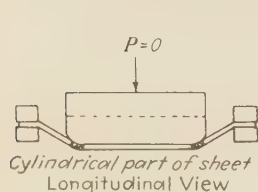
FORMING OF CONVEX CYLINDRICAL PART (SHADED PORTION) FROM SAGGING SHEET
